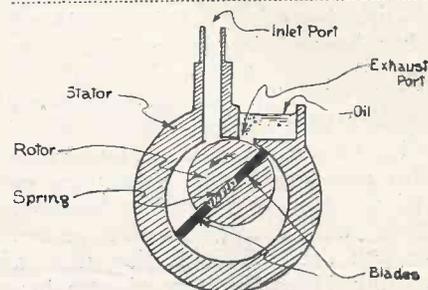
Details of rotary oil-sealed pump for obtaining rough vacuum.
